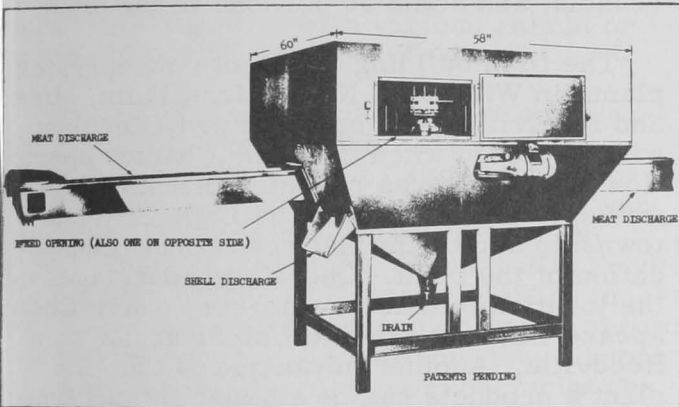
Sketch of crab-picking machine. Shows some detail of the various parts of the machine.
